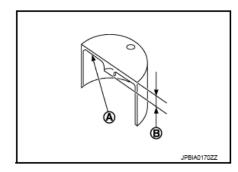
Identifying Valve Lifter (EXH) Thickness And Stamp Mark Courtesy of NISSAN NORTH AMERICA, INC.
